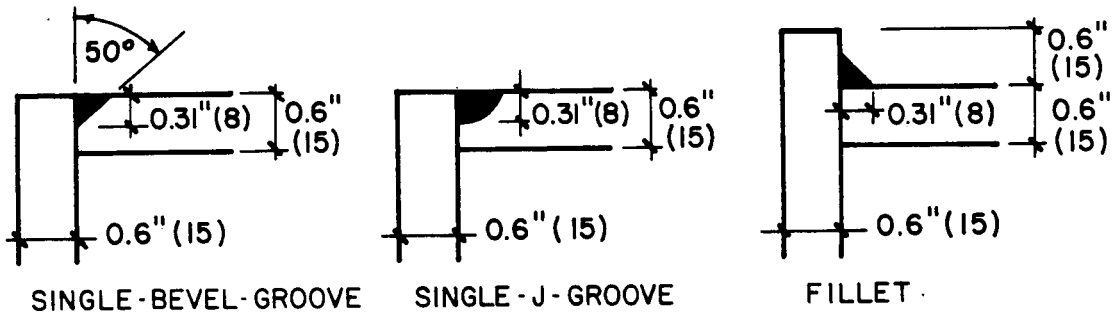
Fatigue Resistance of Web Gusset Plates, FHWA-RD-79-138
